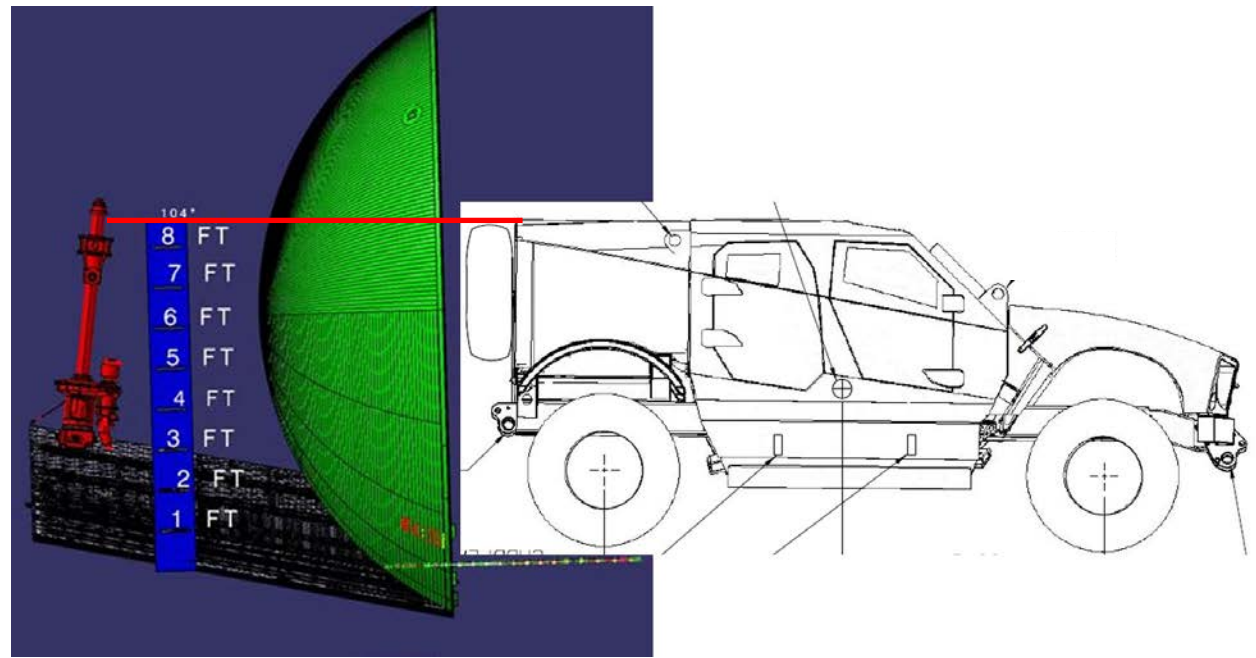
Aft Pressure Bulkhead, Jackscrew and M-ATV side view #1
